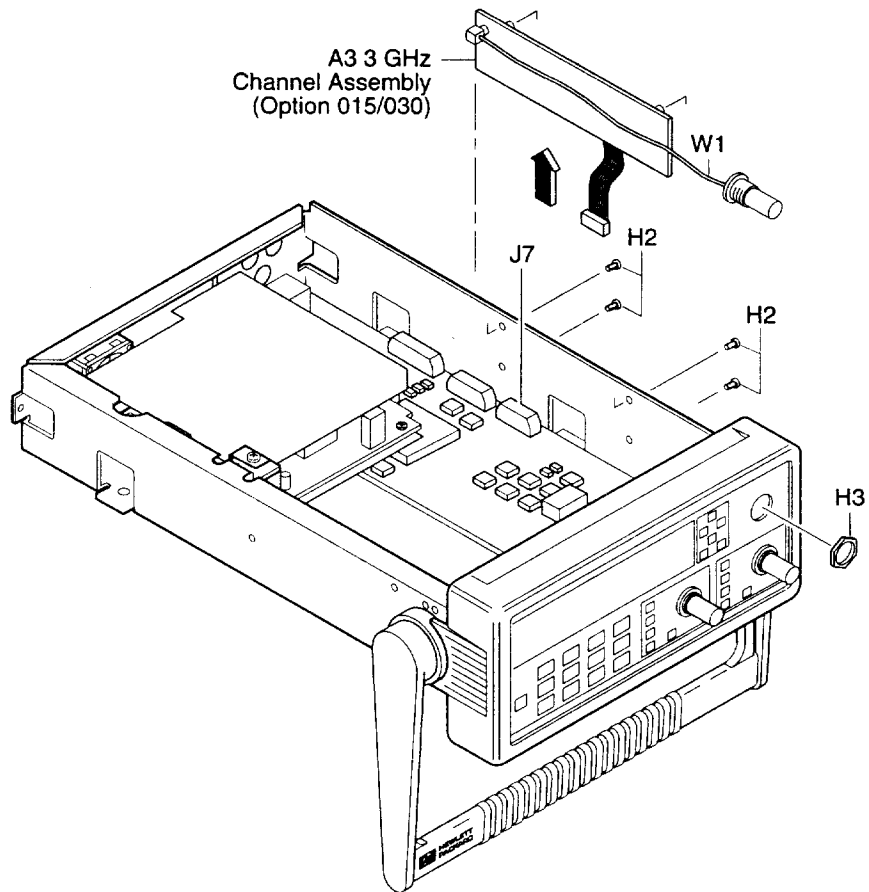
Option 030 3.0 GHz Channel Input Assembly Removal
